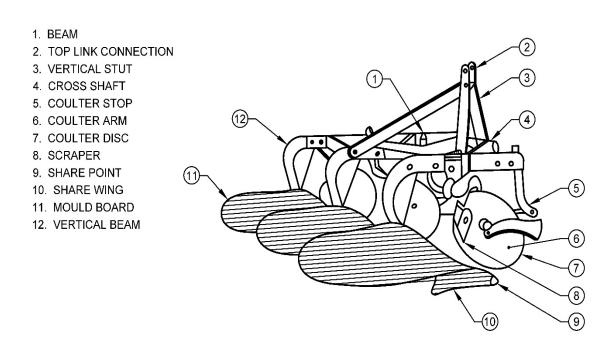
COMPONENTS OF TRACTOR OPERATED 3-BOTTOM MOULD BOARD PLOUGH
